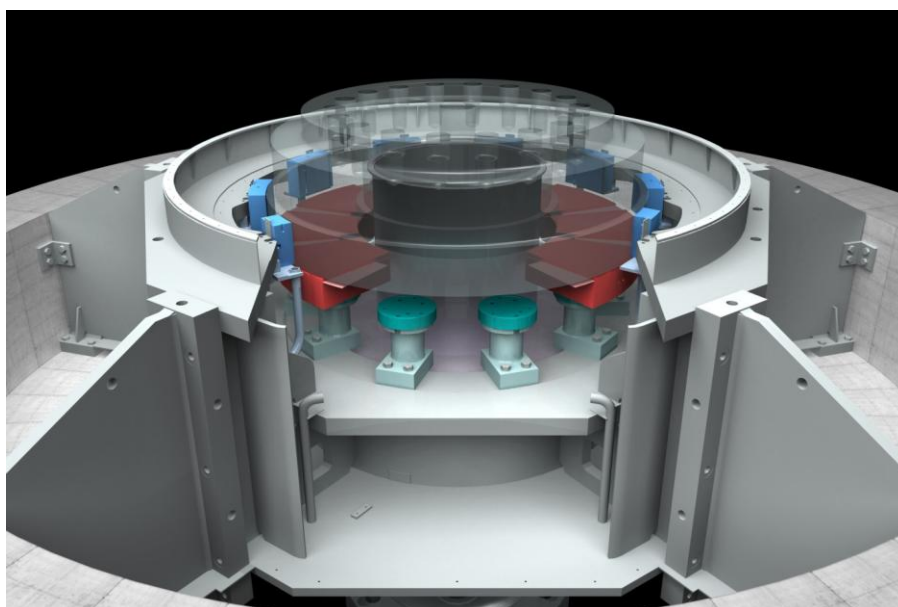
Thrust bearing of a large hydro generator unit (ALSTOM Hydro)
